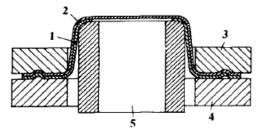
SCHEME OF THE DEVICE FOR THE IN-PLANE STRETCHING TEST: (1) DRIVING BLANK; (2) SPECIMEN; (3) DIE; (4) BLANKHOLDER; (5) PUNCH
